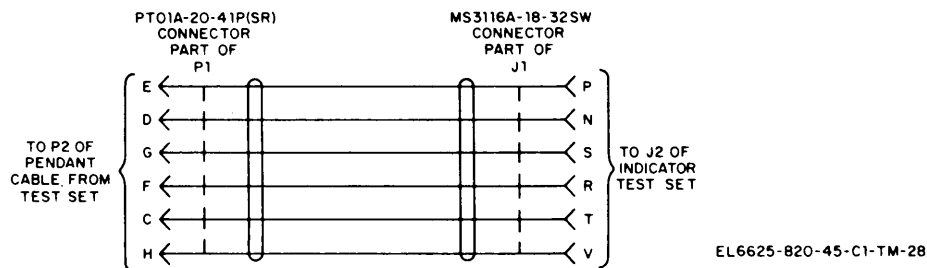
Fabricated cable to indicator test set, construction details.
